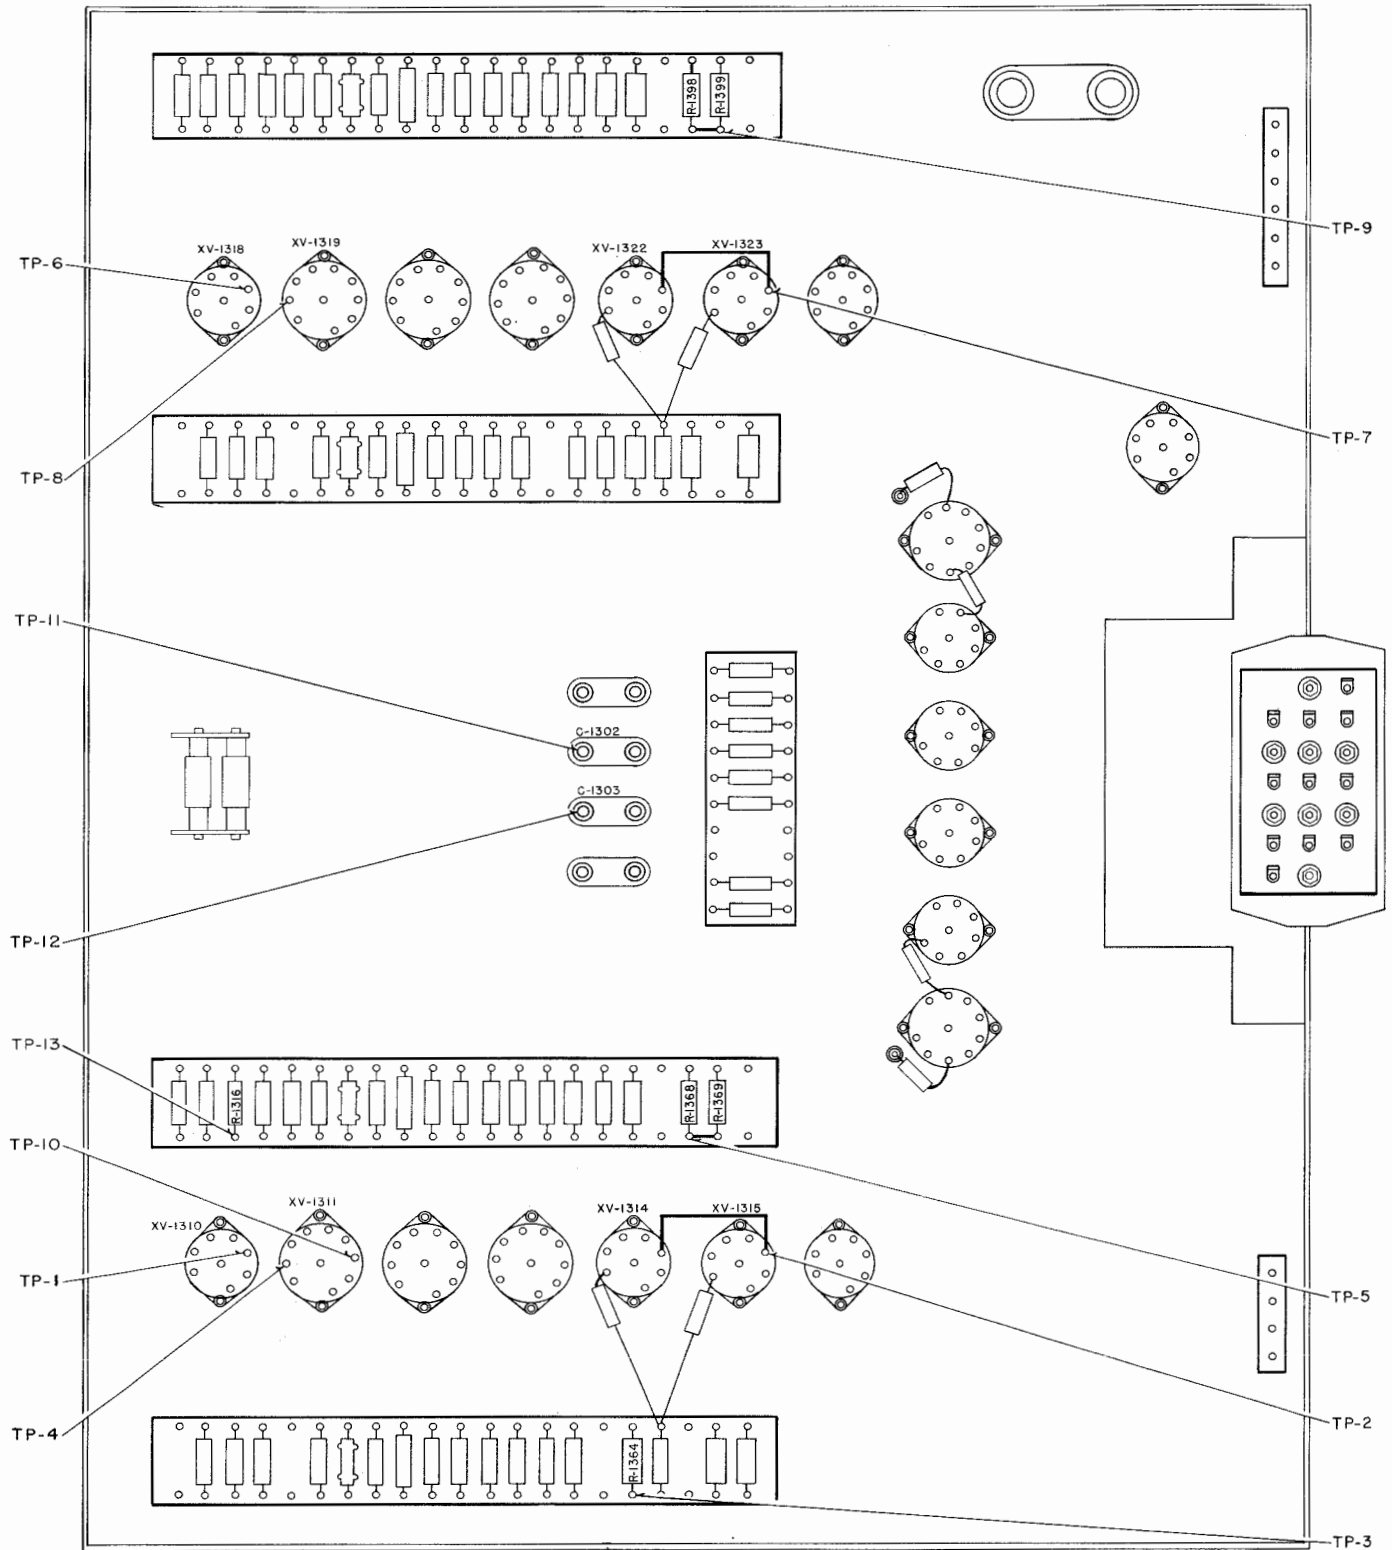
Test Point Locations Bottom of Chassis, Comparator Keyer CM-32/FRR-24
